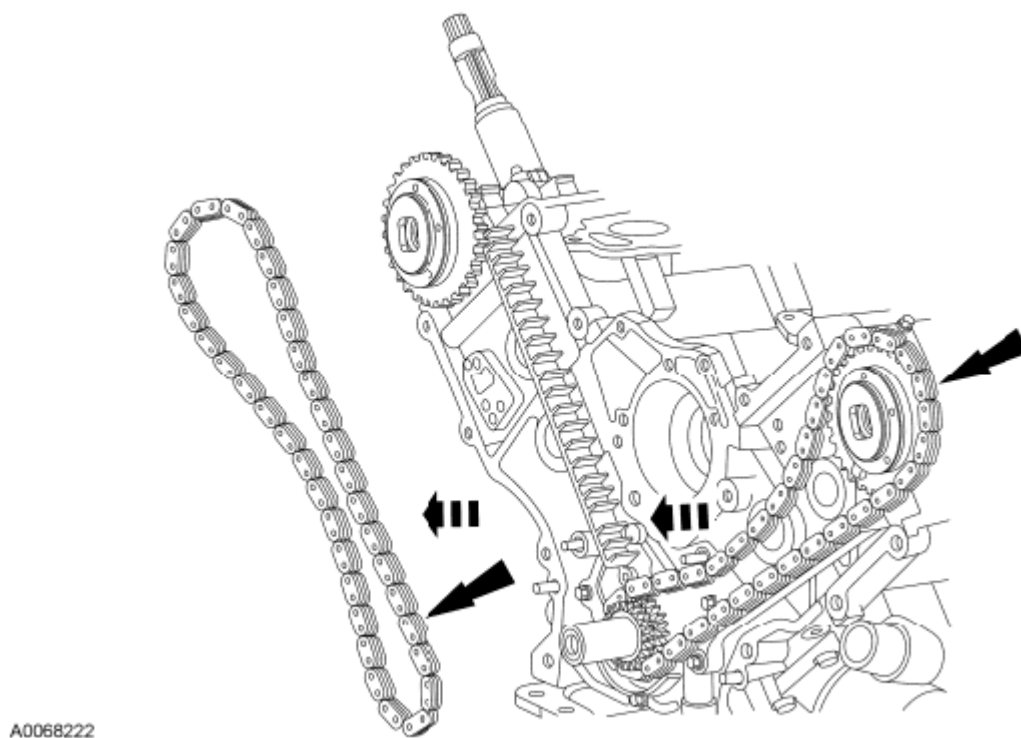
Removing Timing Chains And Crankshaft Sprocket
